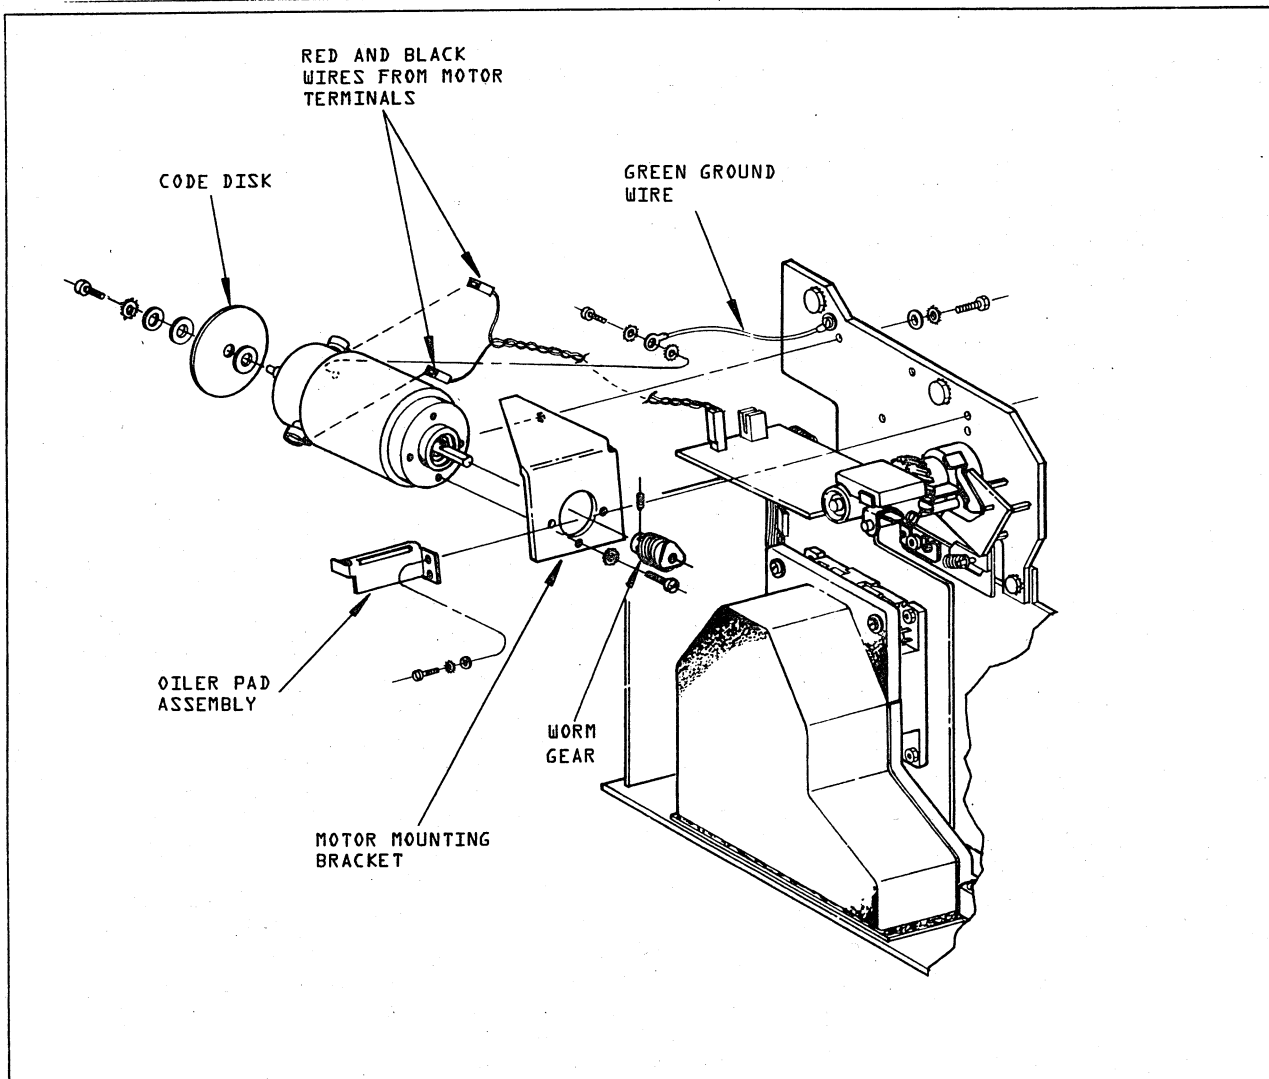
VERTICAL SERVO MOTOR REPLACEMENT
